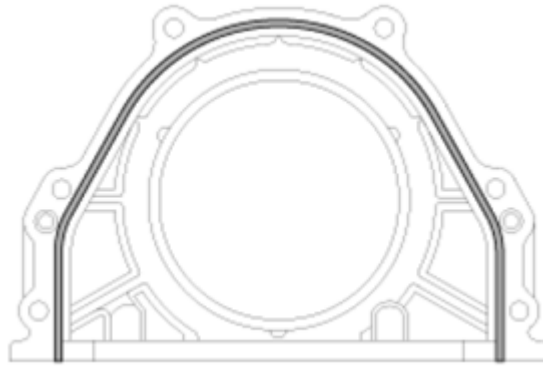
Identifying Sealant And Rear Oil Seal Case
